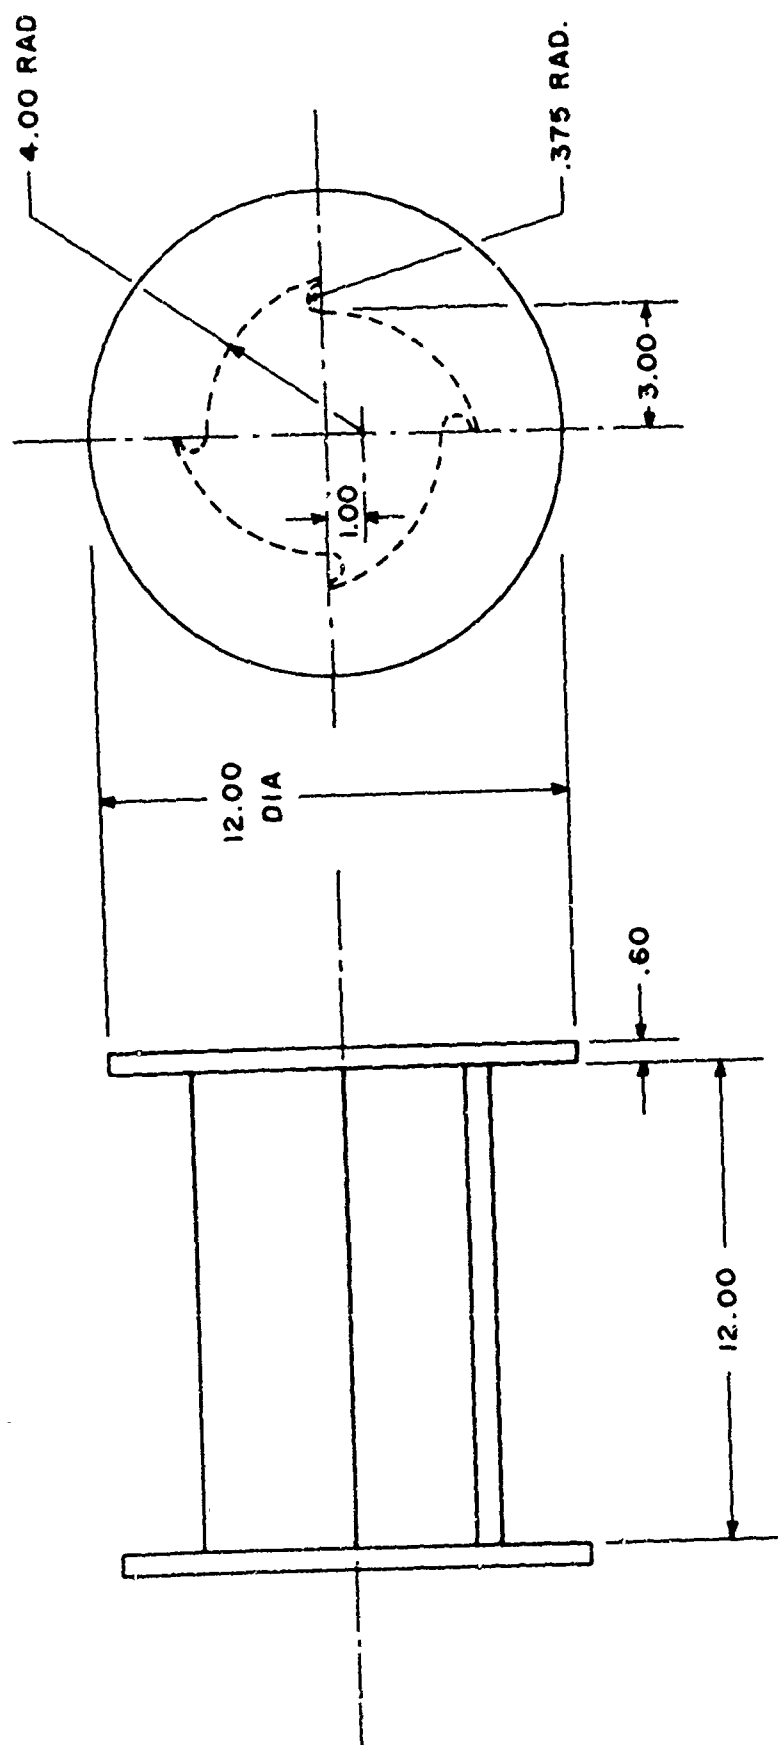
CYLINDRICAL MAGNUS ROTORS 1, 3, 4A, and 11. DIMENSIONS IN INCHES
